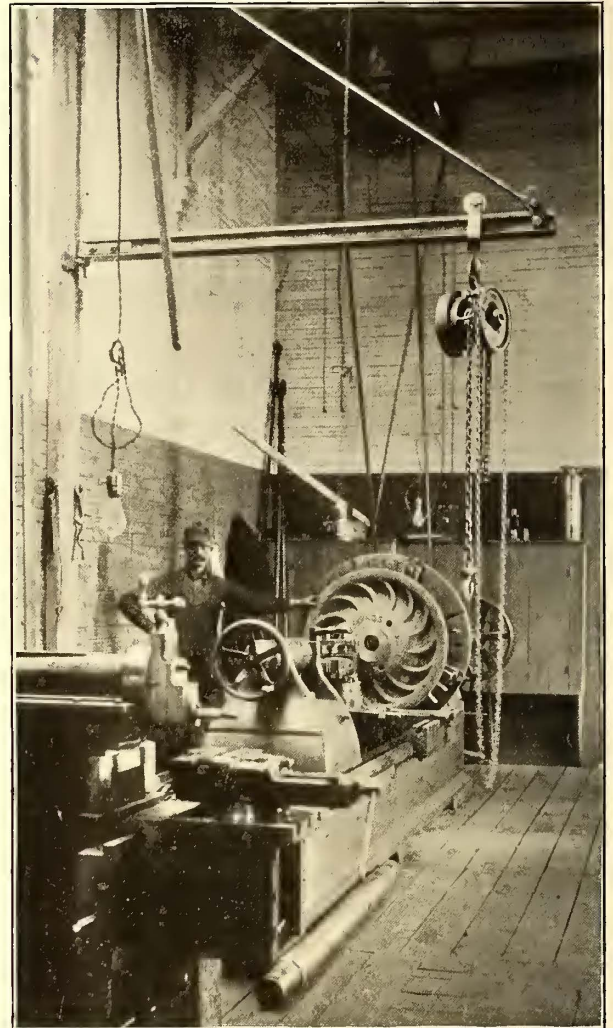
SWINGING CRANE OVER BORING MACHINE
